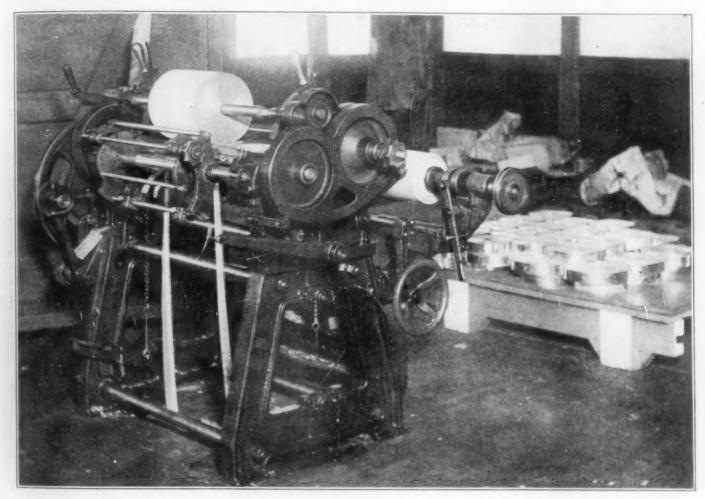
THE TIN FOIL IS NOW HANDLED THE SAME AS PAPER. WE SHOW PHOTOGRAPHS OF THE SLITTING AND REWINDING WITH PATENTED SEPARATOR, WHICH PREVENTS THE SLITTED AND REWOUND MATERIAL FROM INTERLOCKING. THE MATERIAL SPOOLED ON THIS MACHINE DOES NOT HAVE TO BE WEDGED APART.
